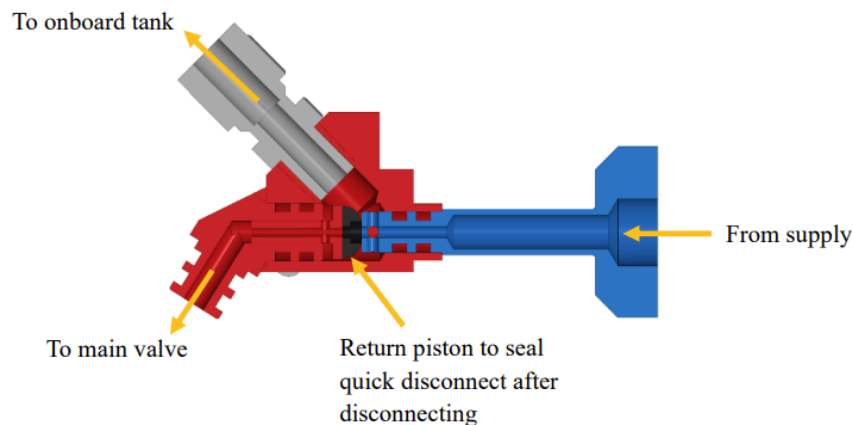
Labelled cross-section view of the quick-disconnect fill assembly
